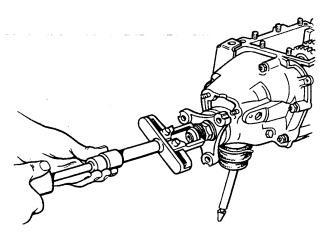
Removing Aligning Ring of Propeller Shaft Flexible Coupling with Remover Tools A.40006/1 and A.40005/4
